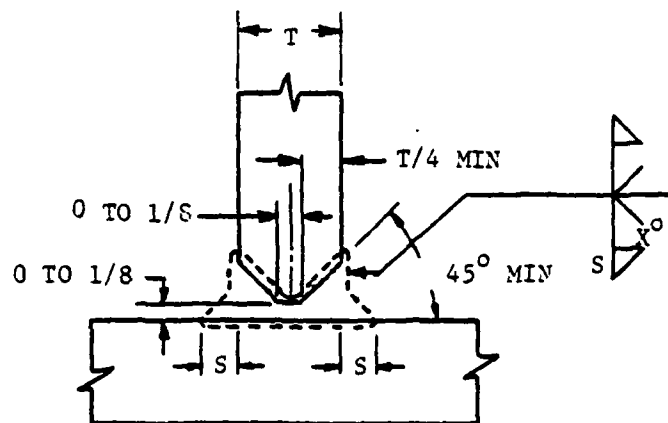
Tee Joint, Fillet-Welded.
